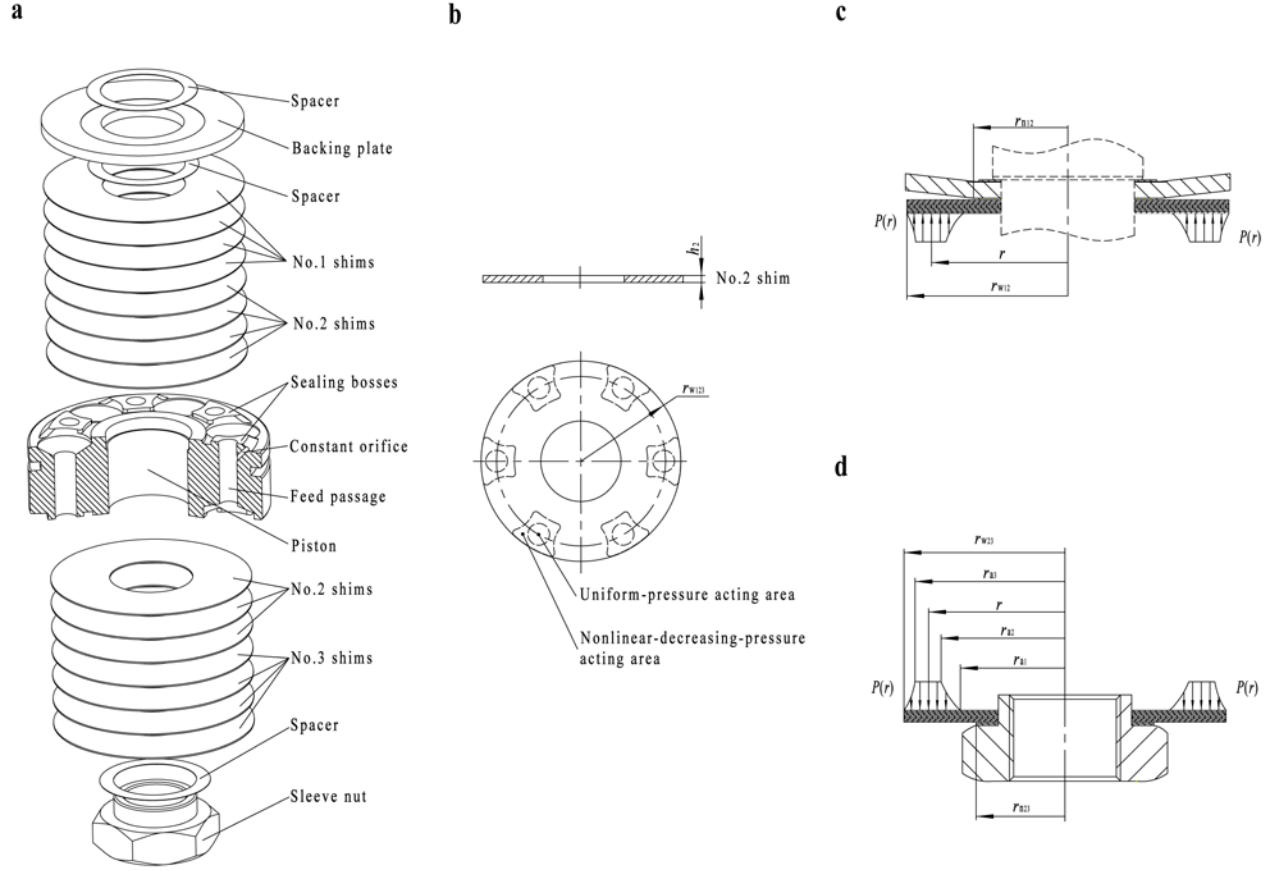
Exploded view of the piston assembly (a), cross-section and schematic pressure acting areas on the surface of the sealing shim (No. 2 shim) (b), operating principle of the piston compression valve (c) and that of the piston extension valve (d).
